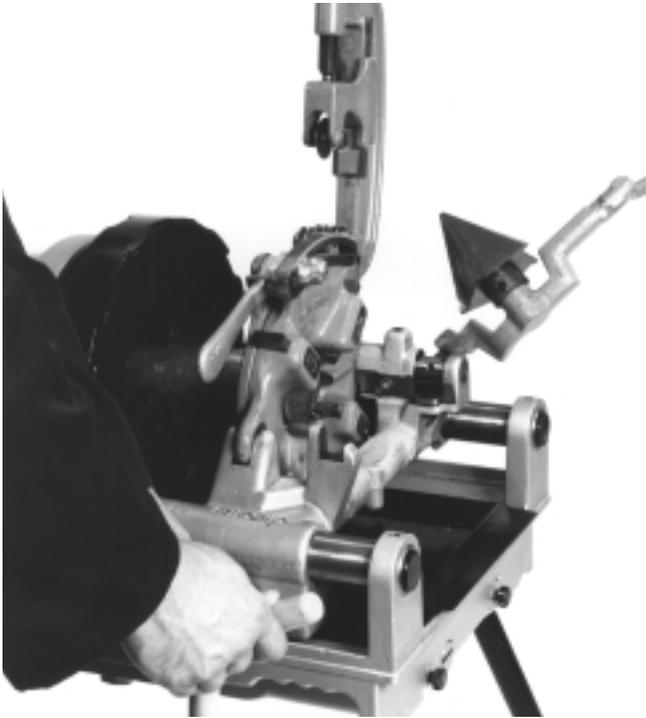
Threading with No. 811-A Quick-Opening Die Head
